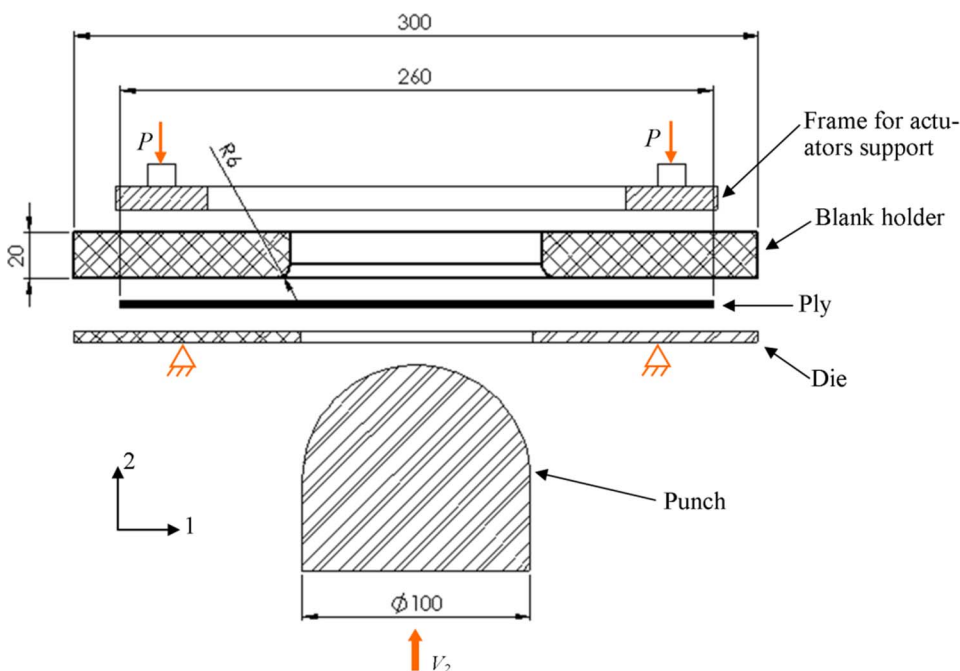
Forming machine scheme with characteristic dimensions. All dimensions are in mm.
